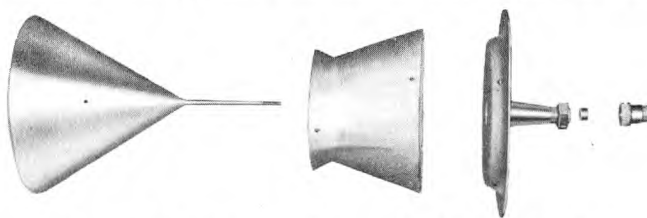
Antenna Assembly AT-49/APR-4—Disassembled View
